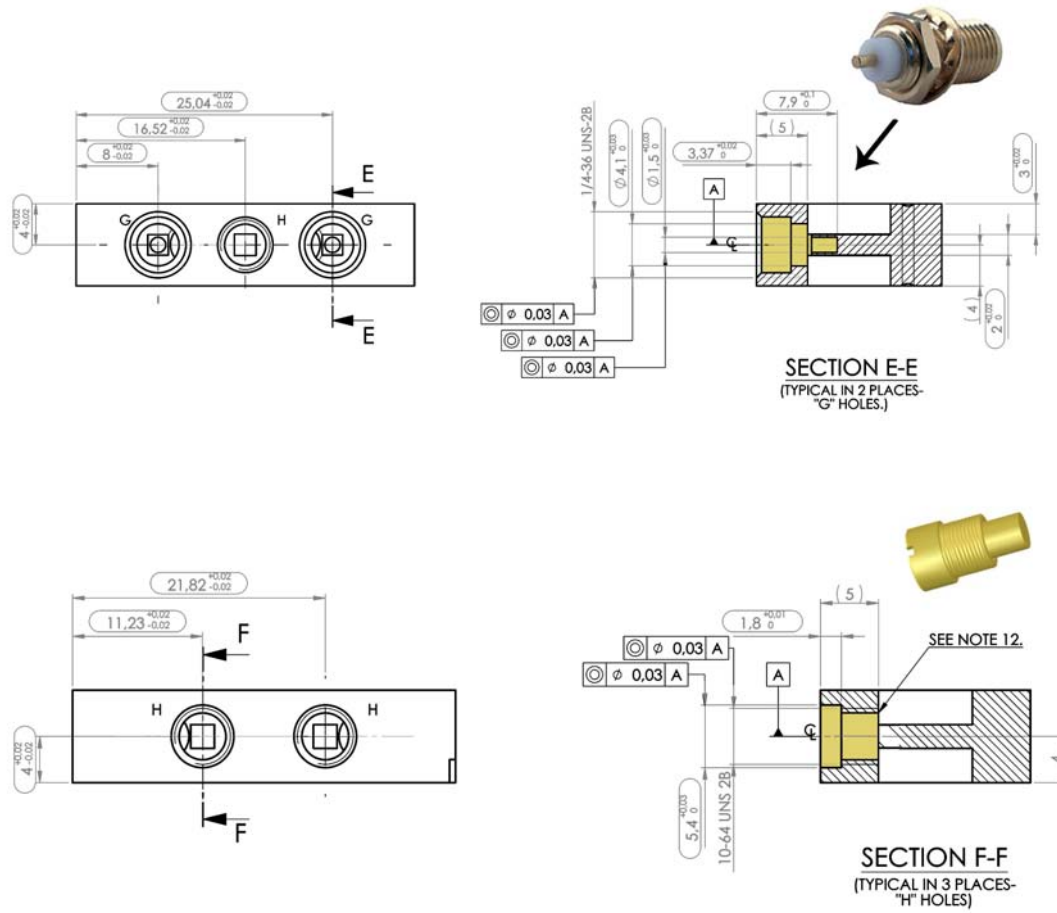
Filter 3 (Version 3), Dimensions (c).
